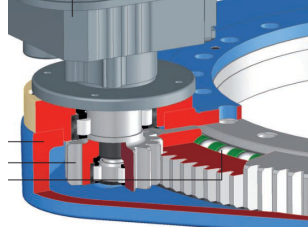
Slewing mechanism selected: Slewing Ring and Spur Gear
